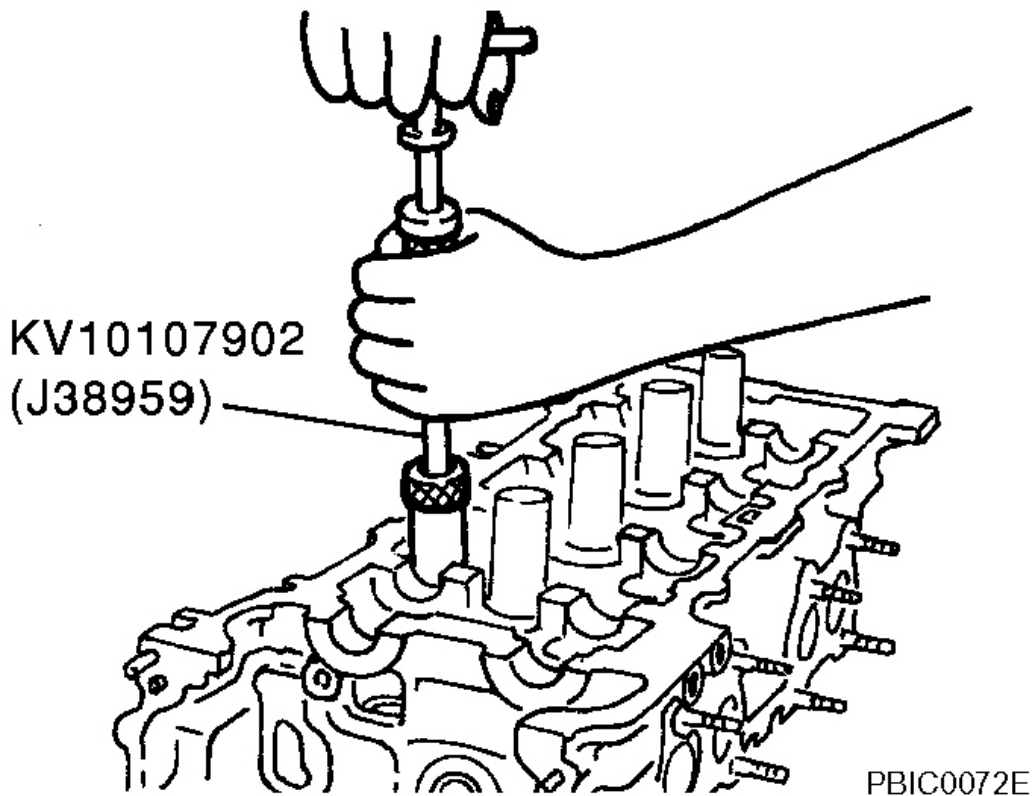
Removing Valve Oil Seal With Valve Oil Seal Puller
